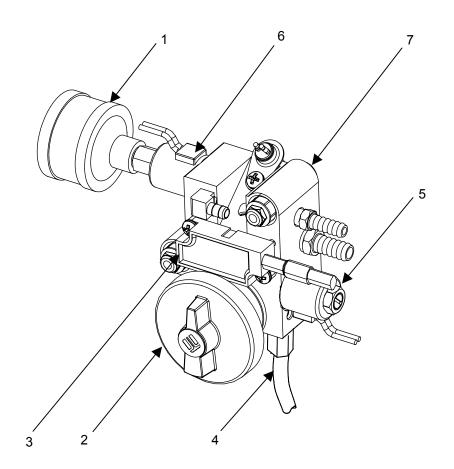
Replacing Parts Without Removing Fuel Delivery Block (MBU-V3 shown)
